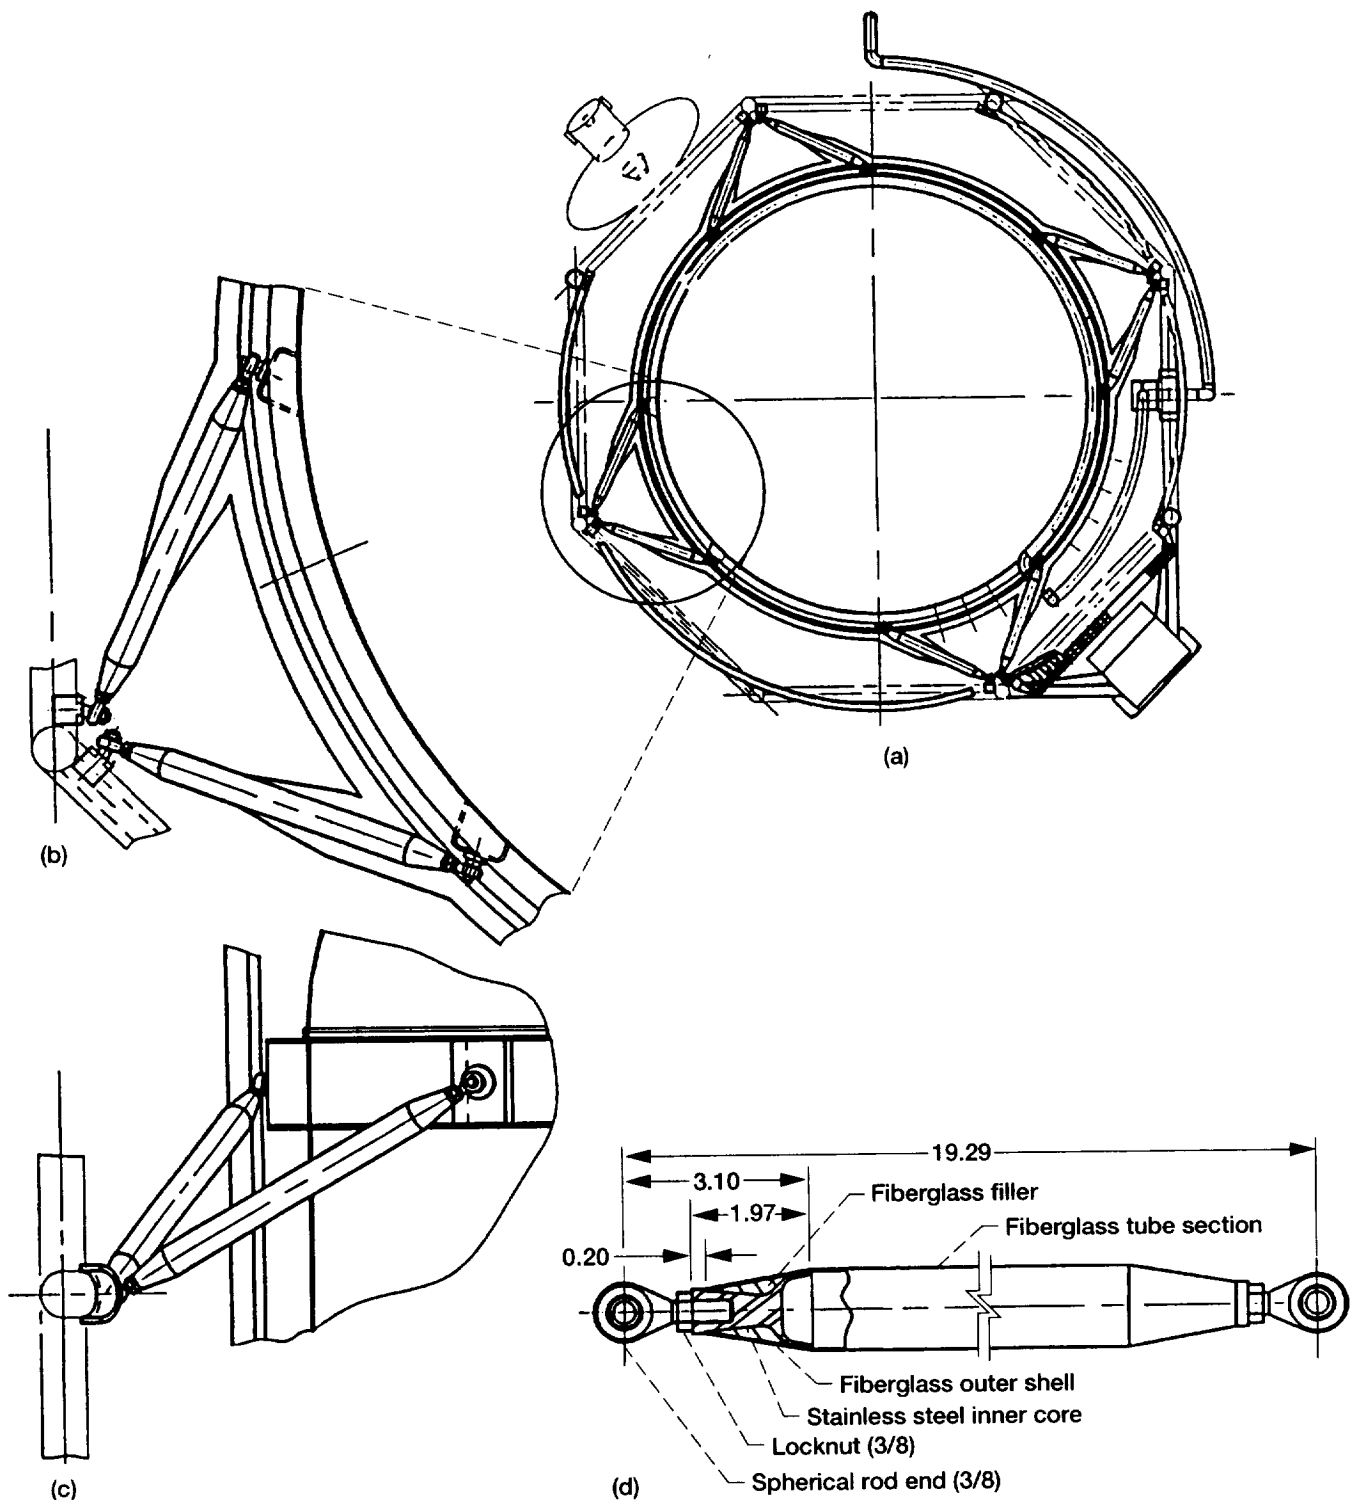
Supply tank strut detail. Dimensions are in inches. (a) Top view of tank supported by struts. (b) Enlargement of strut top view detail. (c) Side view of enlarged strut top view detail. (d) Side view of strut.
